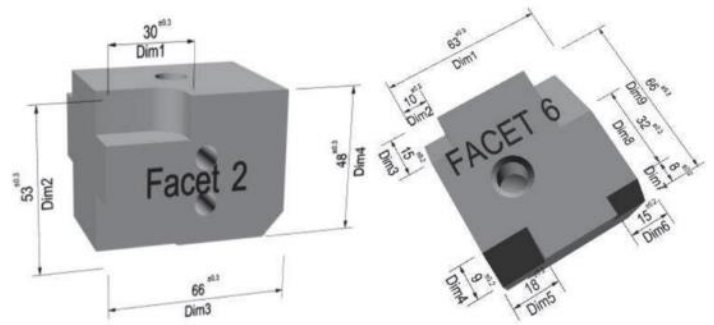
The dimension values and their tolerances of two facets of the workpiece
